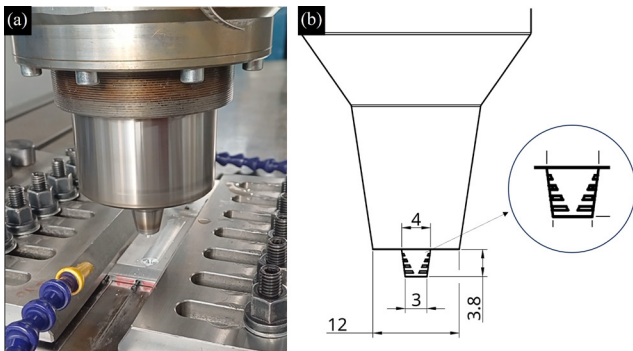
(a) FSW equipment and (b) tool geometry (in mm) used for the welding tests
